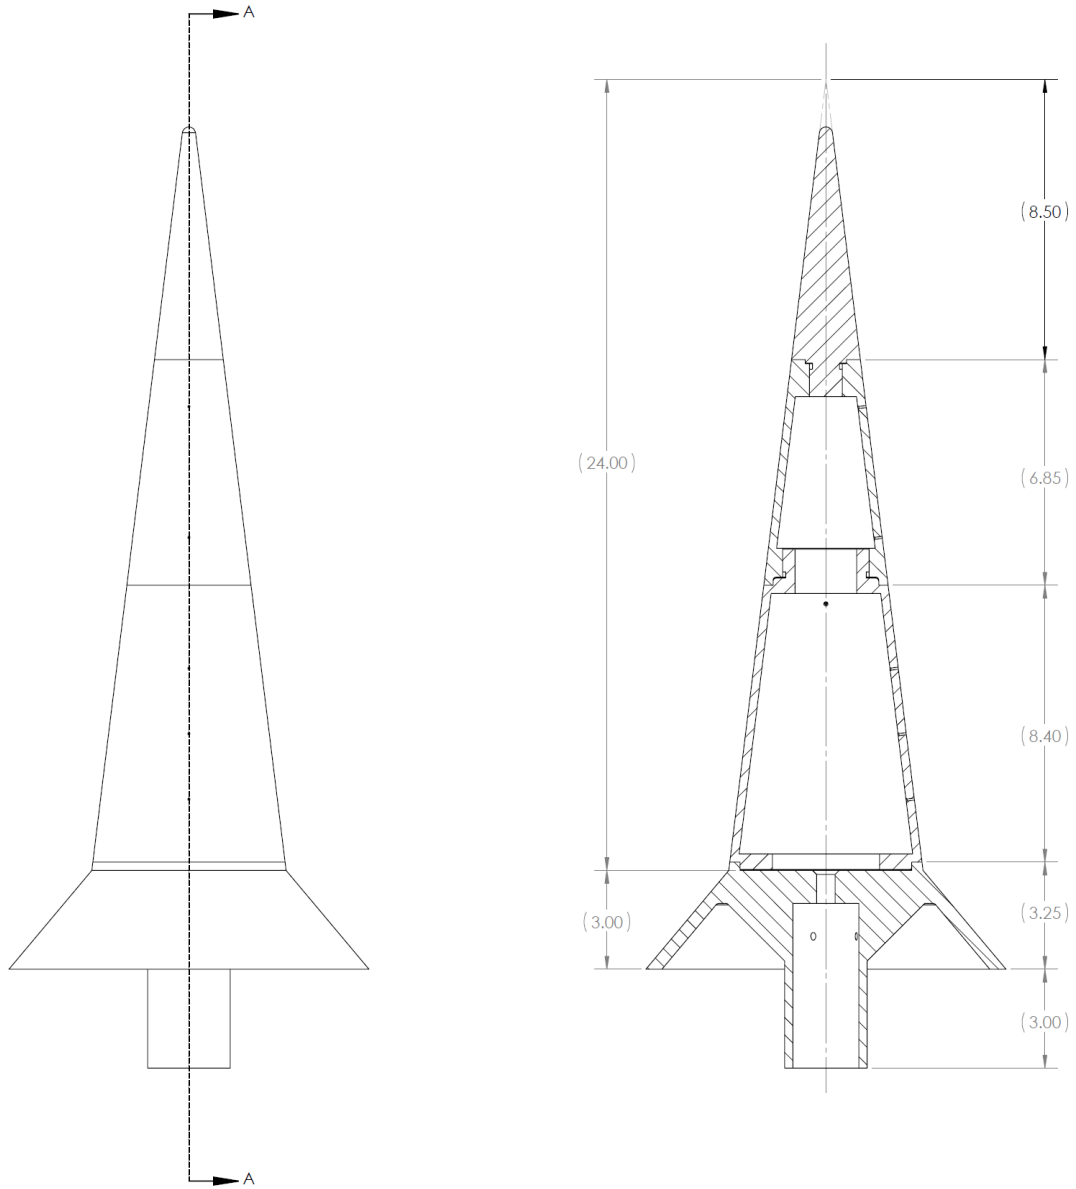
Cone/Flare Model Assembly (5.1mm Radius Tip, 40° Flare Shown) (dimensions in inches)
